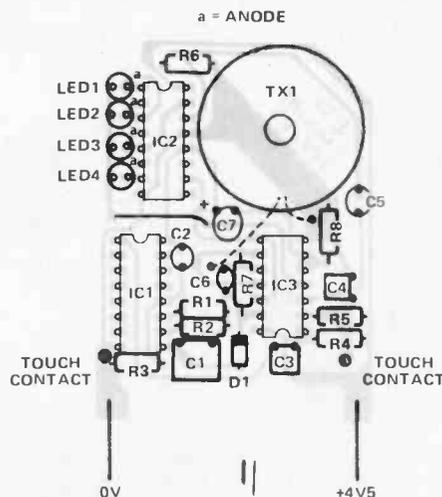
Component overlay for the ETI Parking Meter Timer. You can't use sockets, so take care when soldering the ICs.
